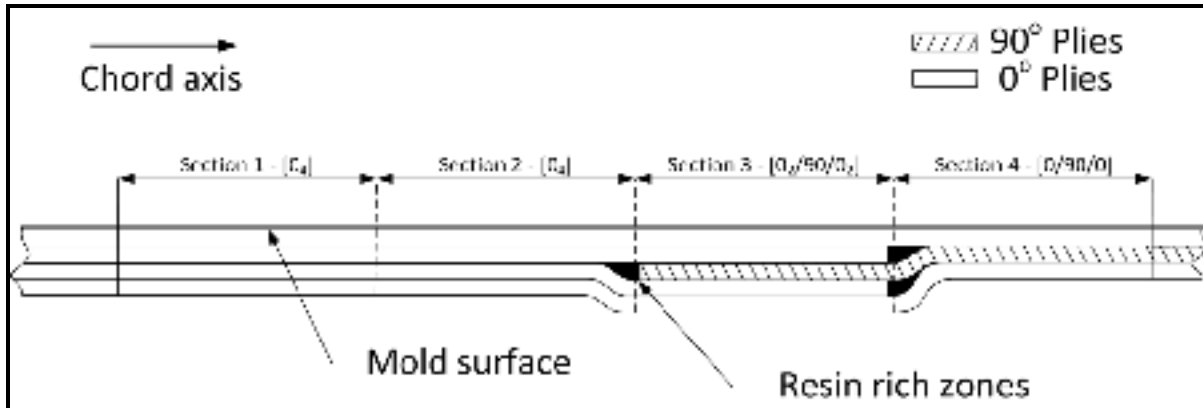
Mold for manufacturing the extrados and lay-up selected
